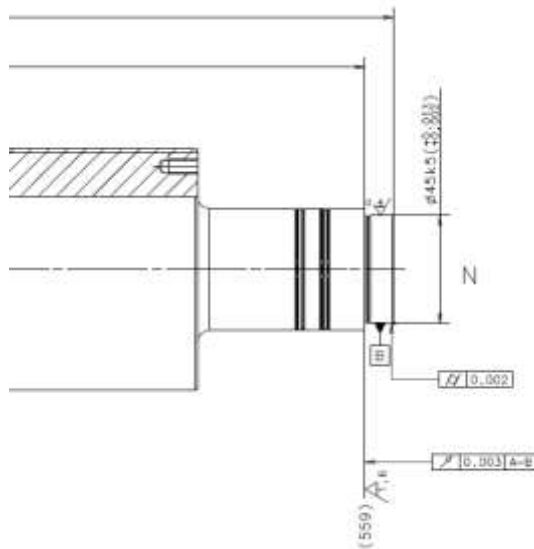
N-end of shaft, the bearing fit tolerances are subject for altering but not the geometrical tolerances.
